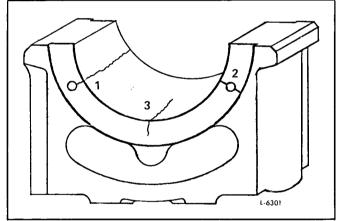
6V Rear Main Bearing Cap Cracks
